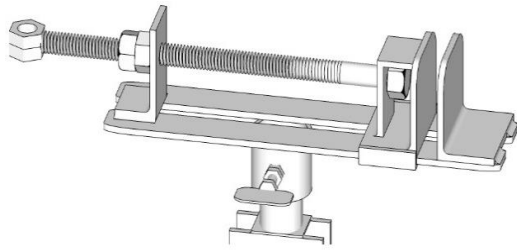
Pictorial drawing pictorial of the apparatus in a head part.
